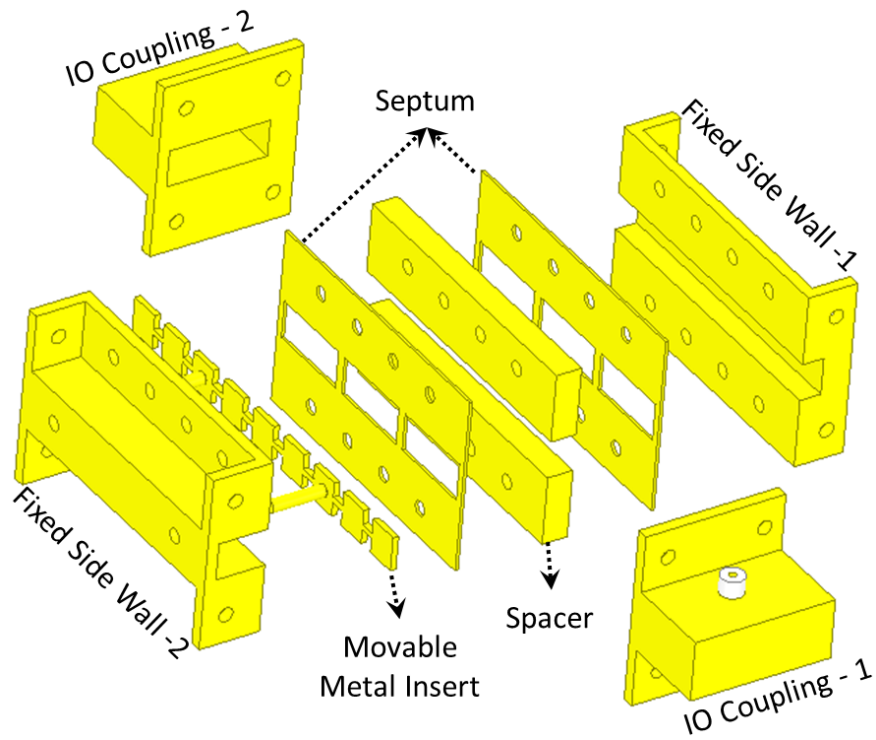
Assembly View of the Proposed Tunable WG Filter
